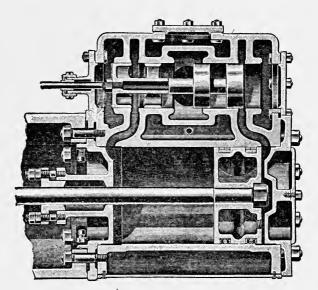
Horizontal Section. Cylinder, Dick and Church Engine.
